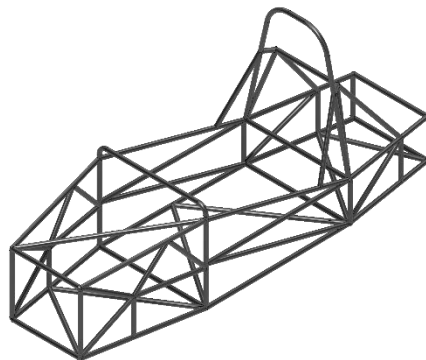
Isometric View of Initial Iteration of the Space-frame chassis
